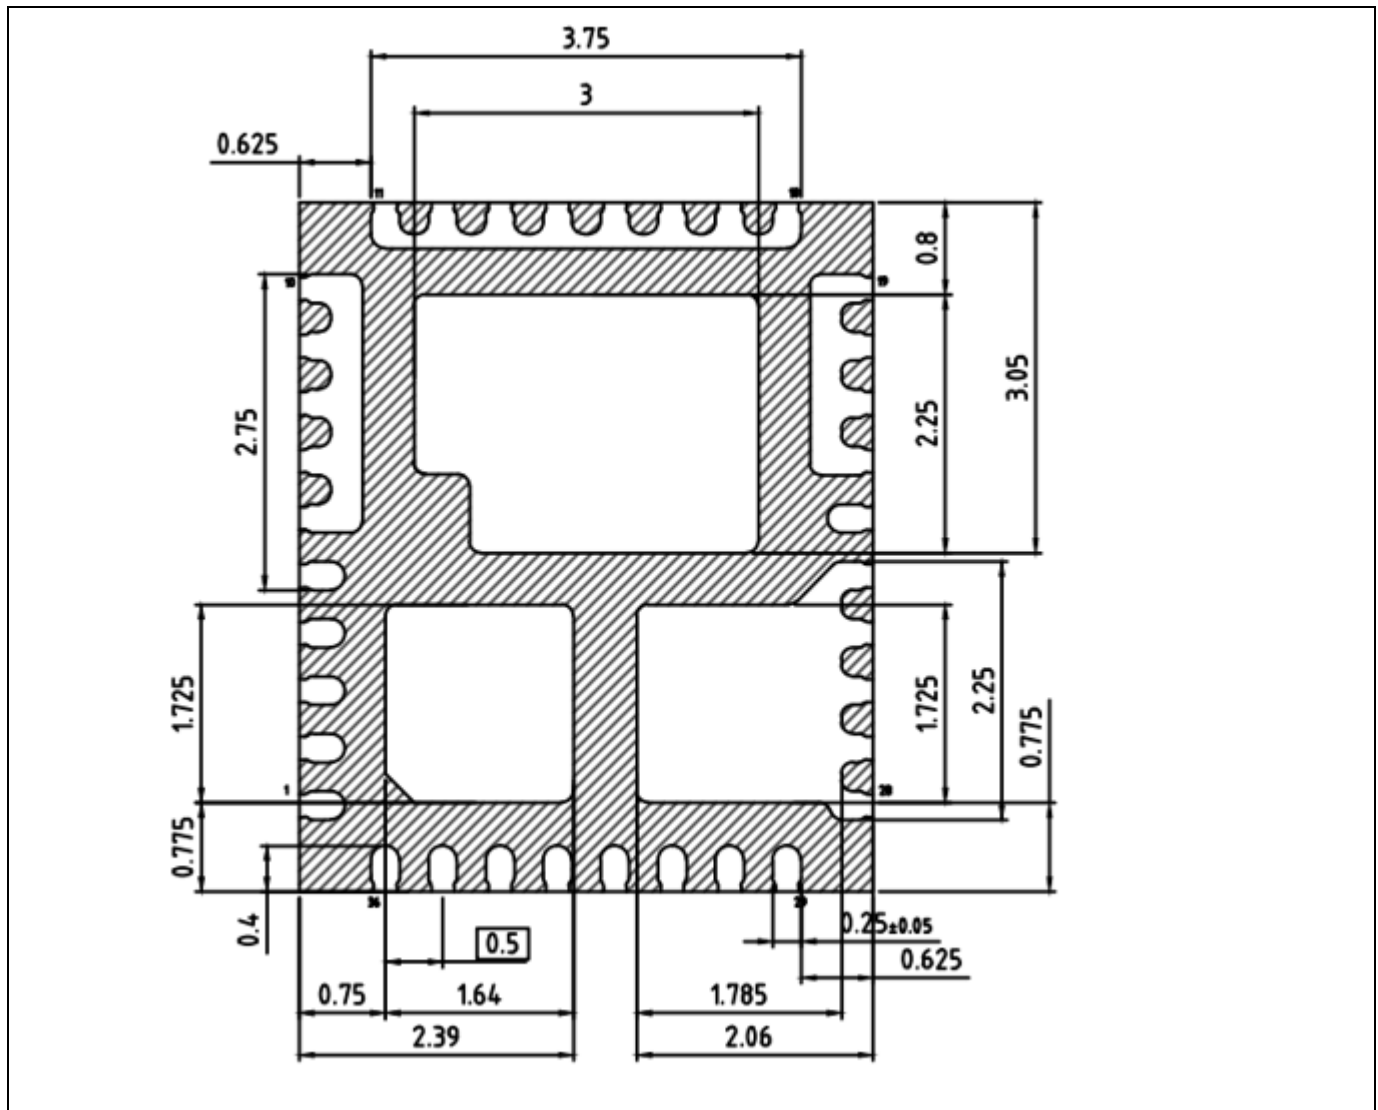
Mechanical Dimensions of Package (Bottom View) in mm
